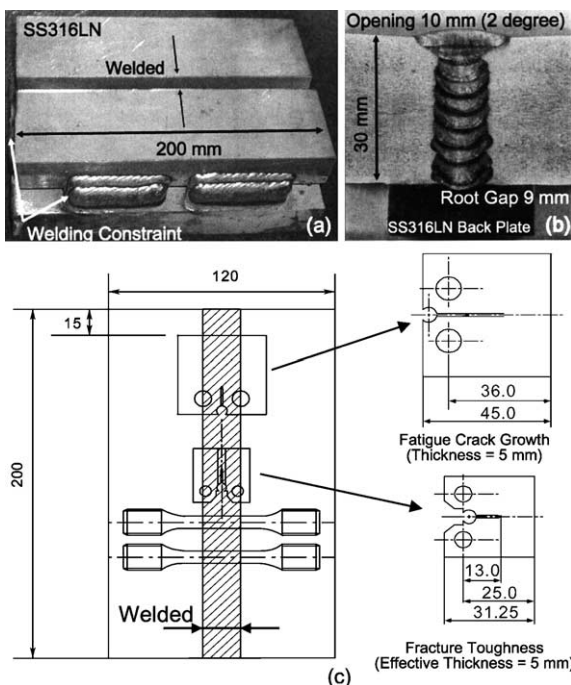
(a) The configuration before welding, (b) weld zone, (c) sampling map on welded plate and the dimension of test pieces (right upper: fatigue crack growth specimen, bottom: fracture toughness specimen).
